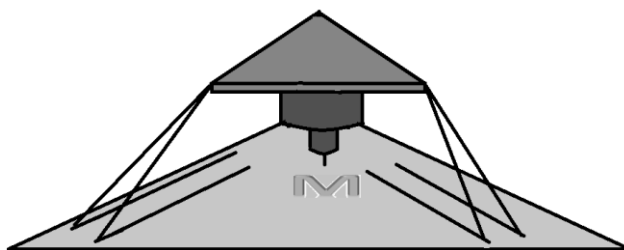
Parallel robot-based laser cutting machine numerical prototype.
